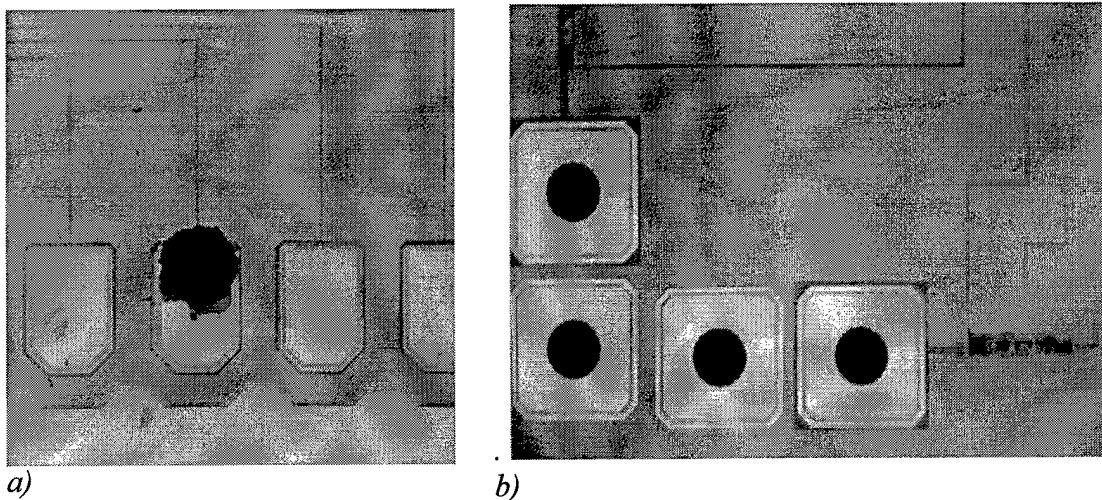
Microphotographs of 0.2 mm holes drilled in chip with laser technique, when (a) The holes were drilled through the metal layers and (b) the metal layers were pre removed.
